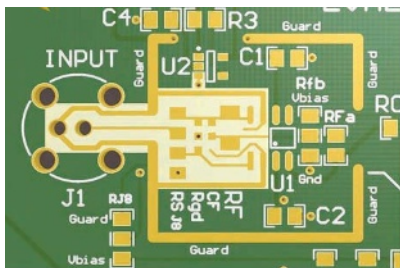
The thick copper trace on this PCB acts as a guard ring. The gold-plated traces prevent corrosion. Remove the solder mask in the guarded area to reduce leakage.
